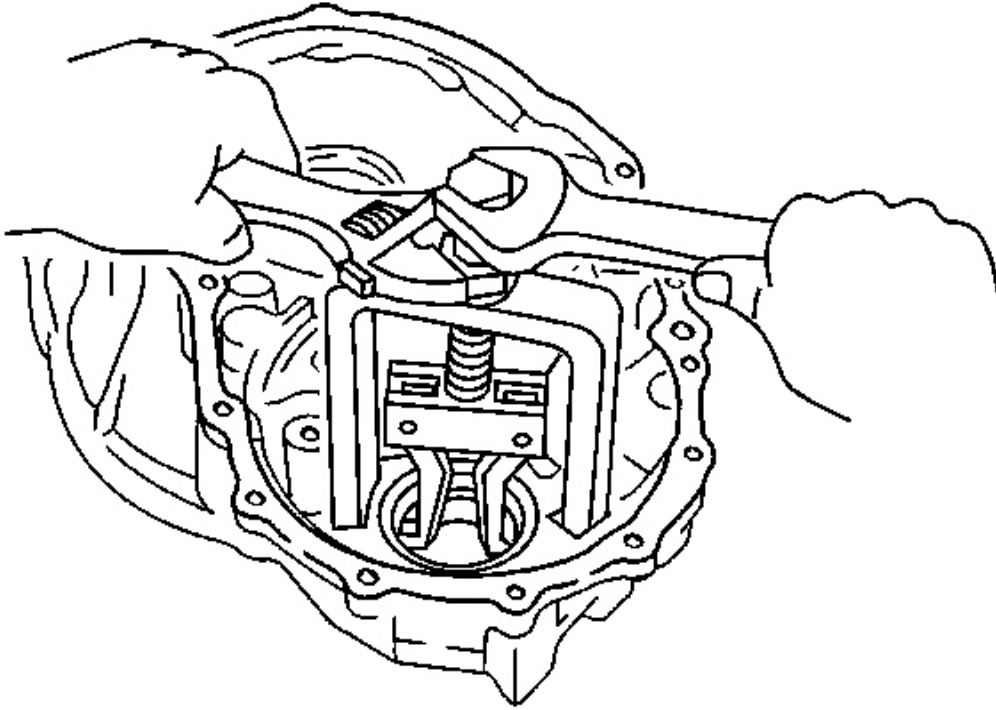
Removing Side Bearing Outer Race & Transaxle Housing Using A Puller
